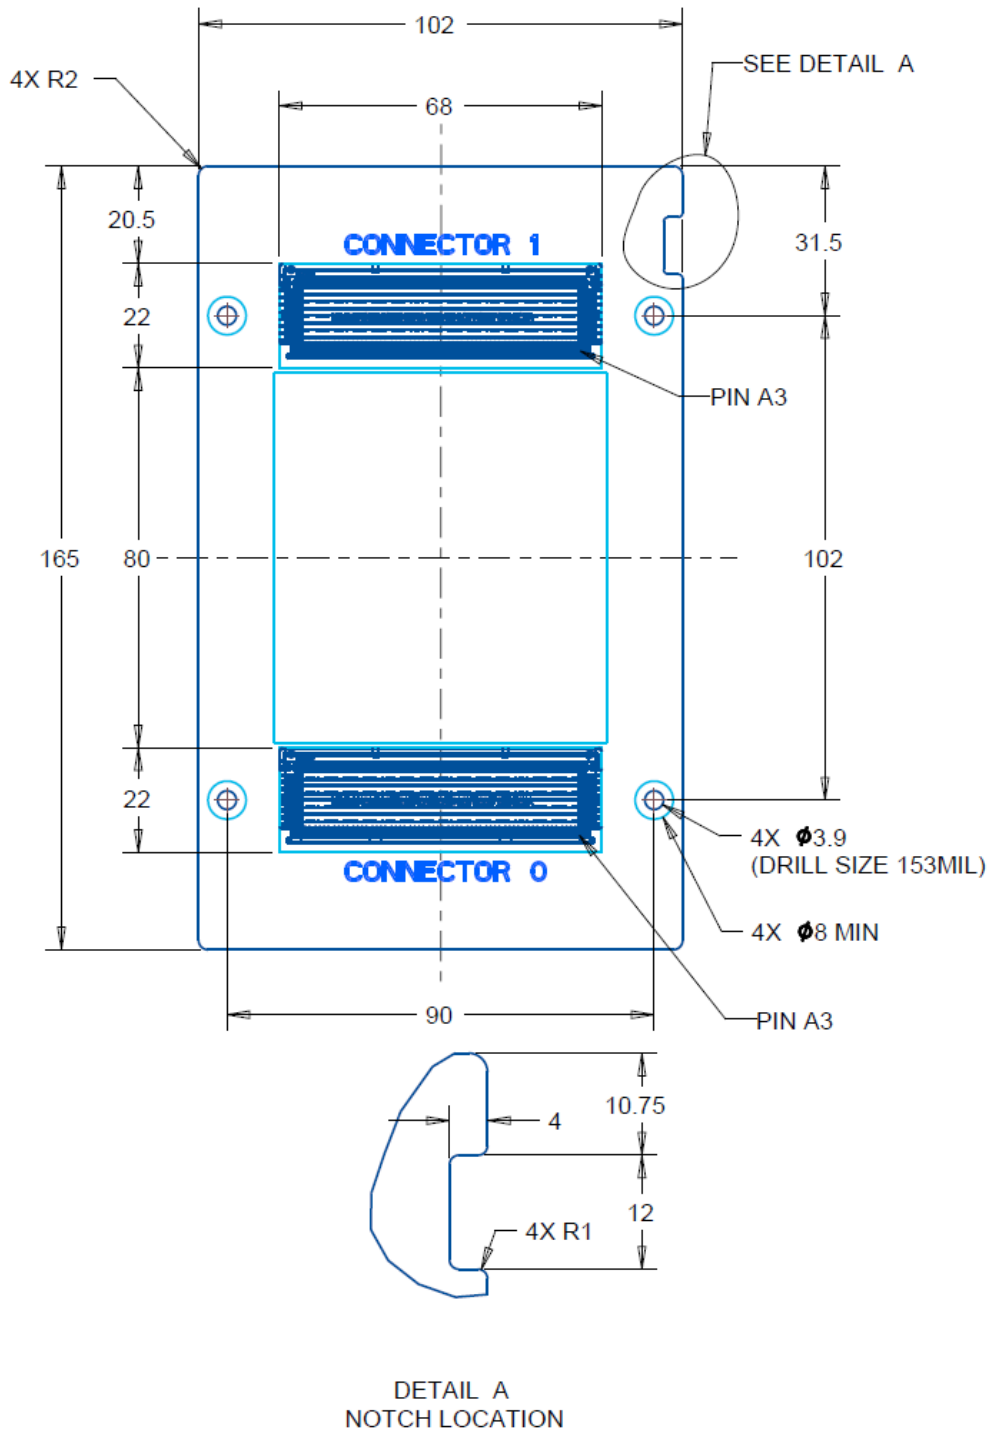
102mm wide OAM Form Factor Dimensions, Bottom View
